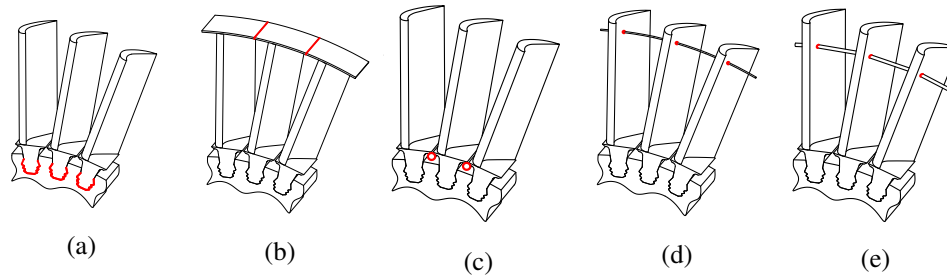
Common friction joints in bladed disks [1]: (a) root joints, (b) shrouds, (c) under-platform dampers, (d) damper wires, (e) damper pins.
